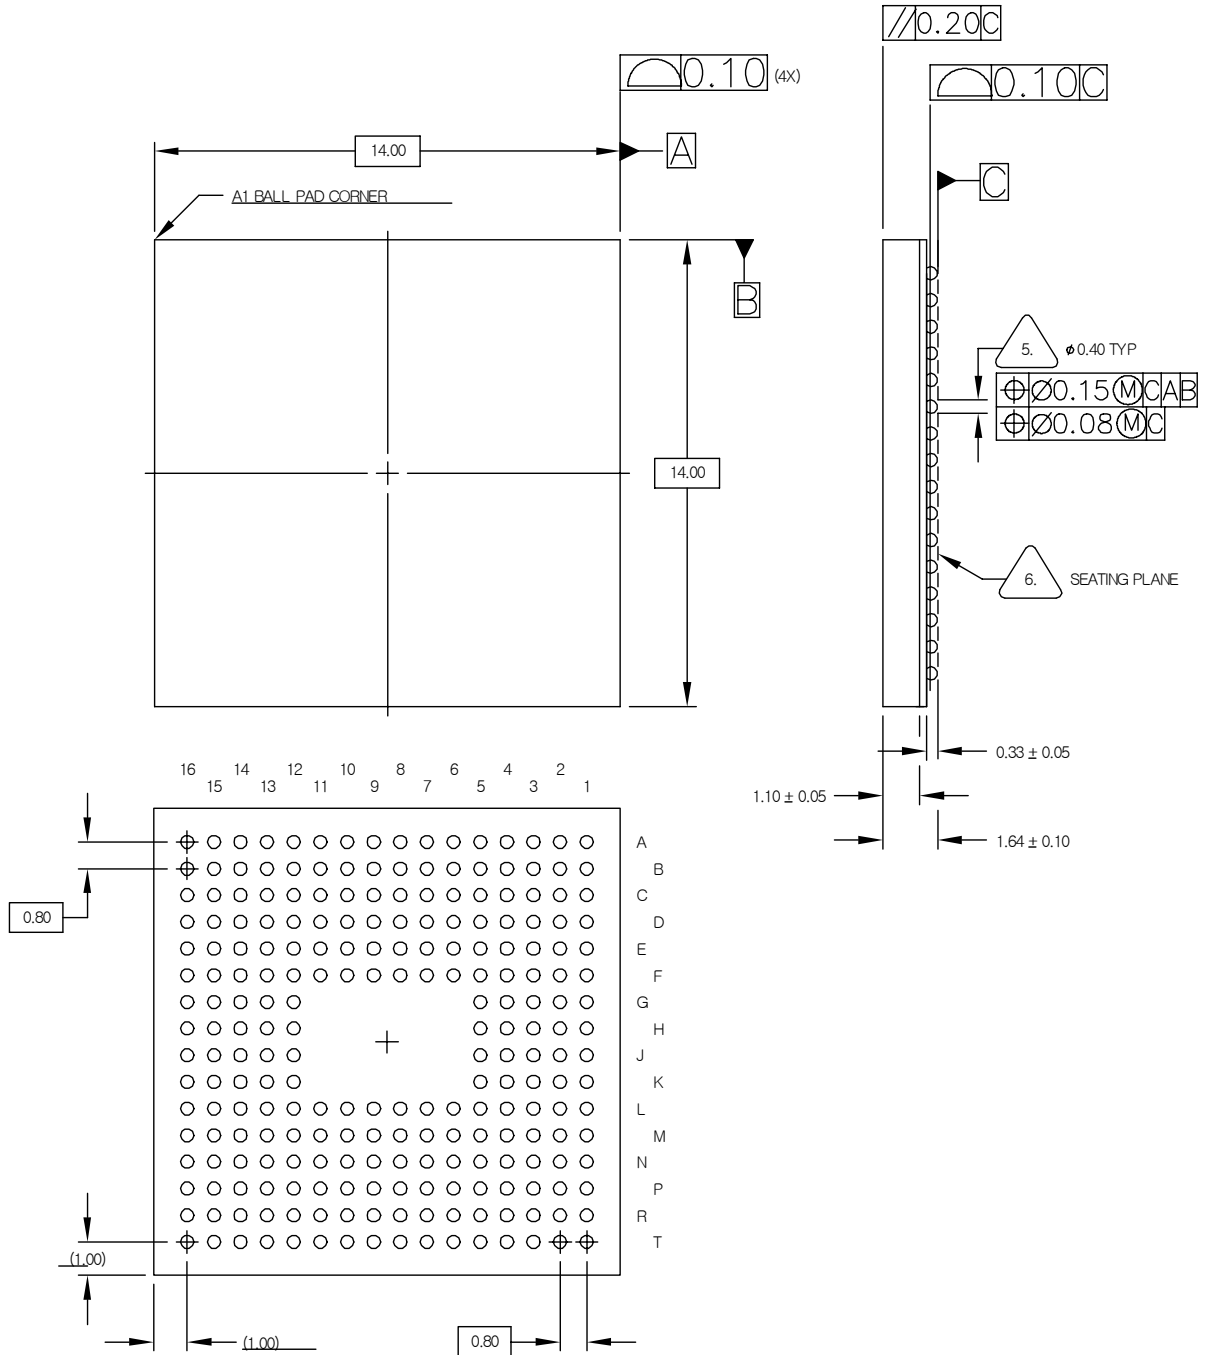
TCC766 Package Dimension (232-FPBGA-1414)
